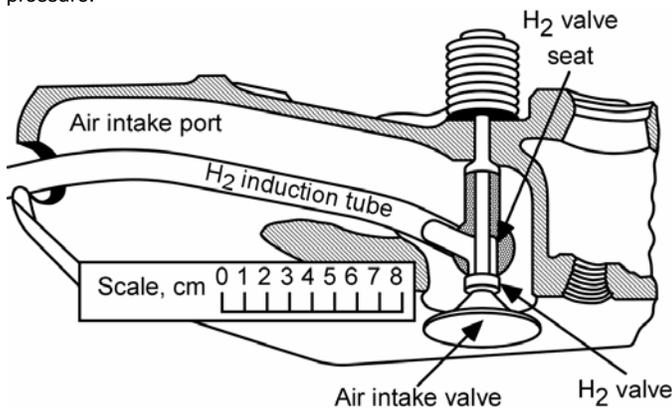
Section of cylinder head with delayed hydrogen valve, seat, and induction tube exemplifying the parallel port system. (Courtesy of F. E. Lynch)
